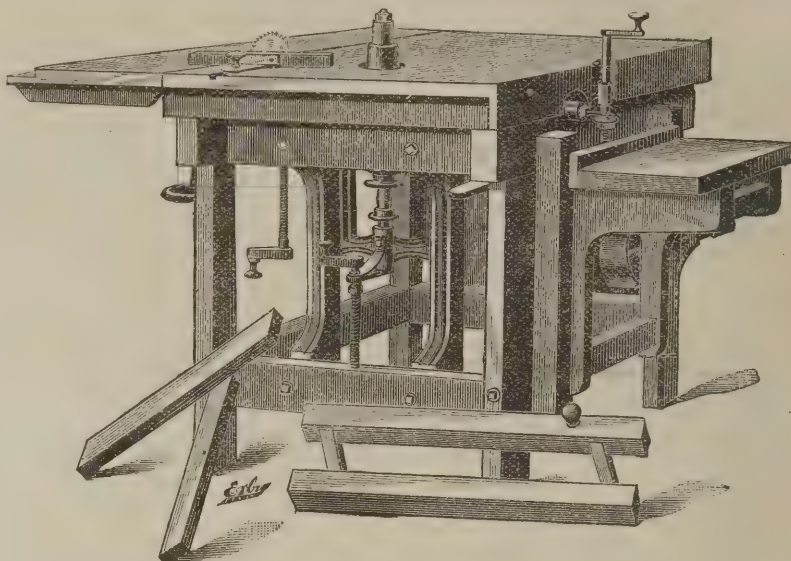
Combined Rip and Cross Cut Saw, Borer and Shaper. Manufactured by Post & Co., Chicago, Ill.
